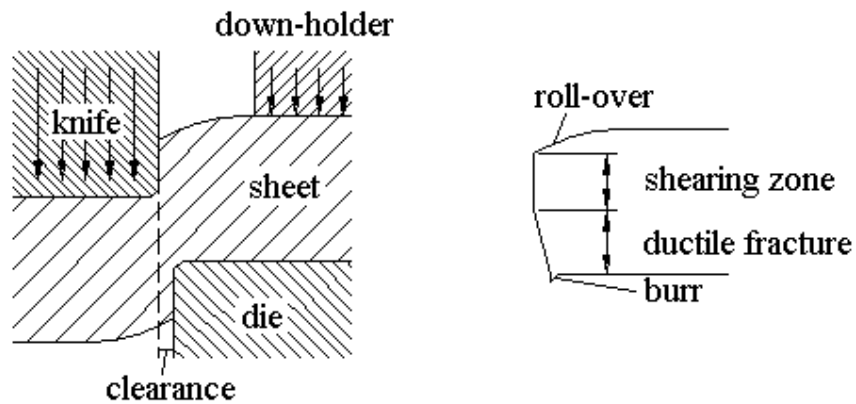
The typical shape of the sheet obtained using punching.
